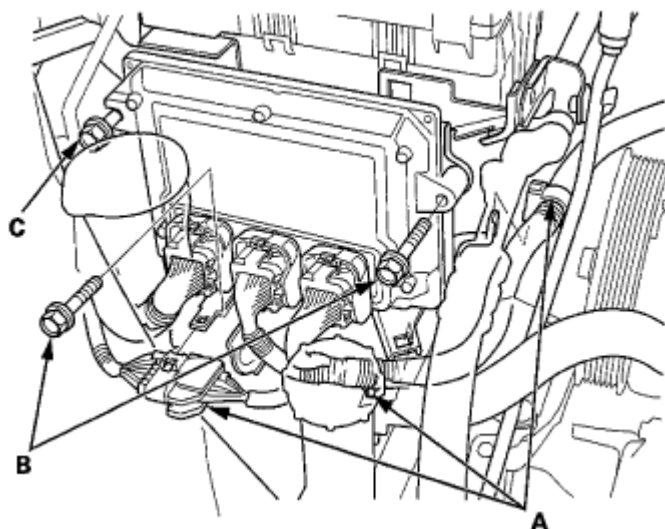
Identifying Harness Clamps Mounting Bolts (Keihin PCM)
